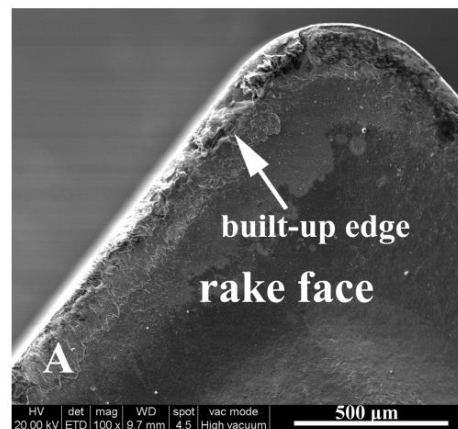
Tool wear mechanism at the rake face (built-up edge) [43]
